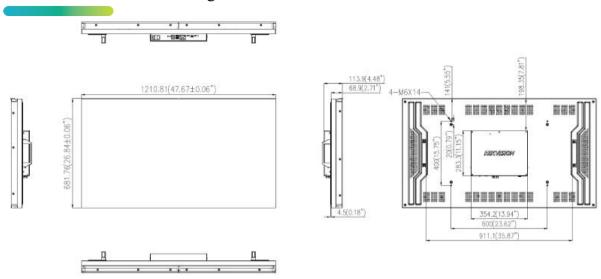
DS-D2055LR-E Cabinet Structure Dimension
